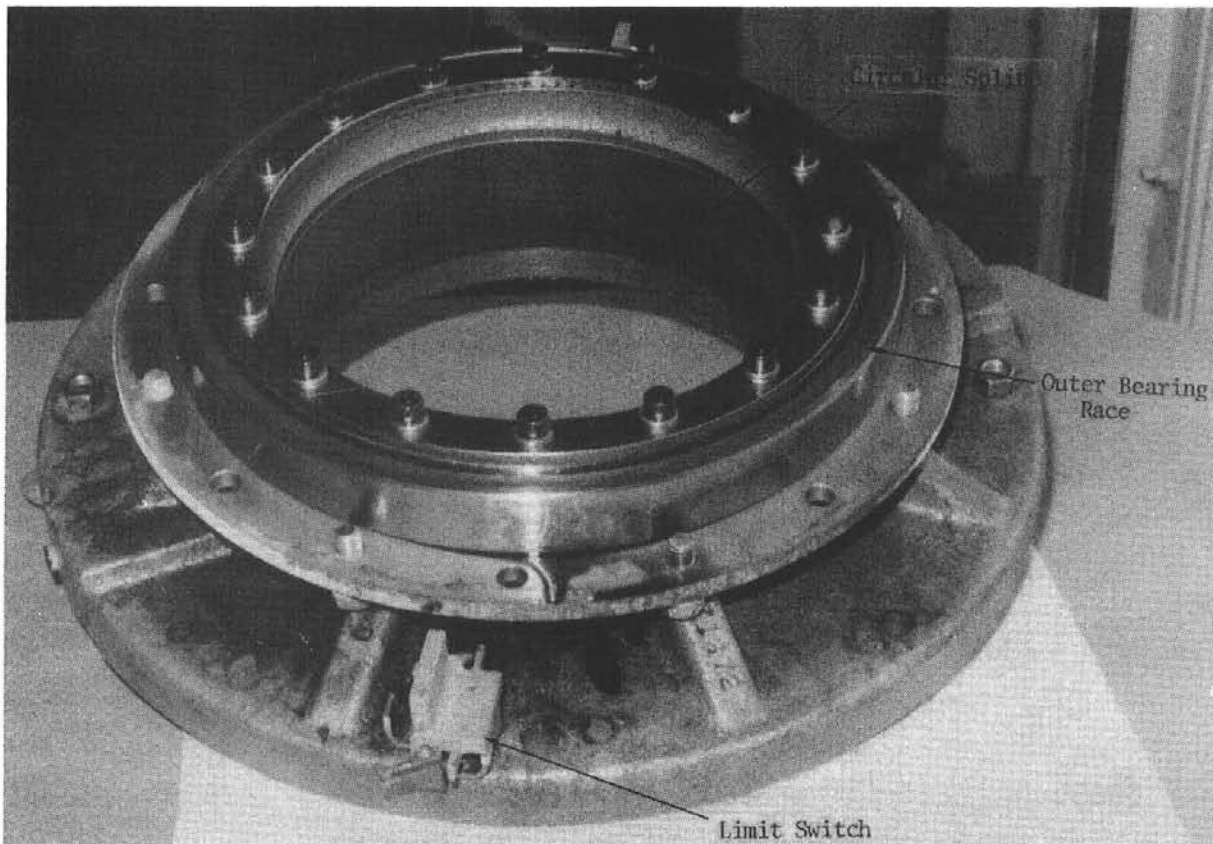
MDAC Harmonic Drive Circular Spline Assembly after Test
